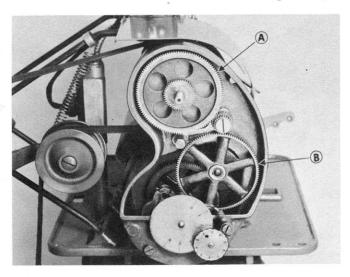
This is the No. 84 Coil Winder gear case showing spindle and clutch gears. To change from "head wind" to "after wind", remove spindle gear (A) and substitute a spindle gear with one or two teeth less when the number of winds in the coil is one or more. If the number of winds is less than one, remove clutch gear (B) and substitute a clutch gear with one or two teeth less.
